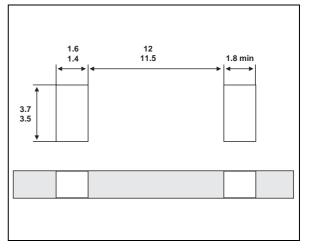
shows an example of the heatsink requirements to assemble a TO220 component with a clip.
